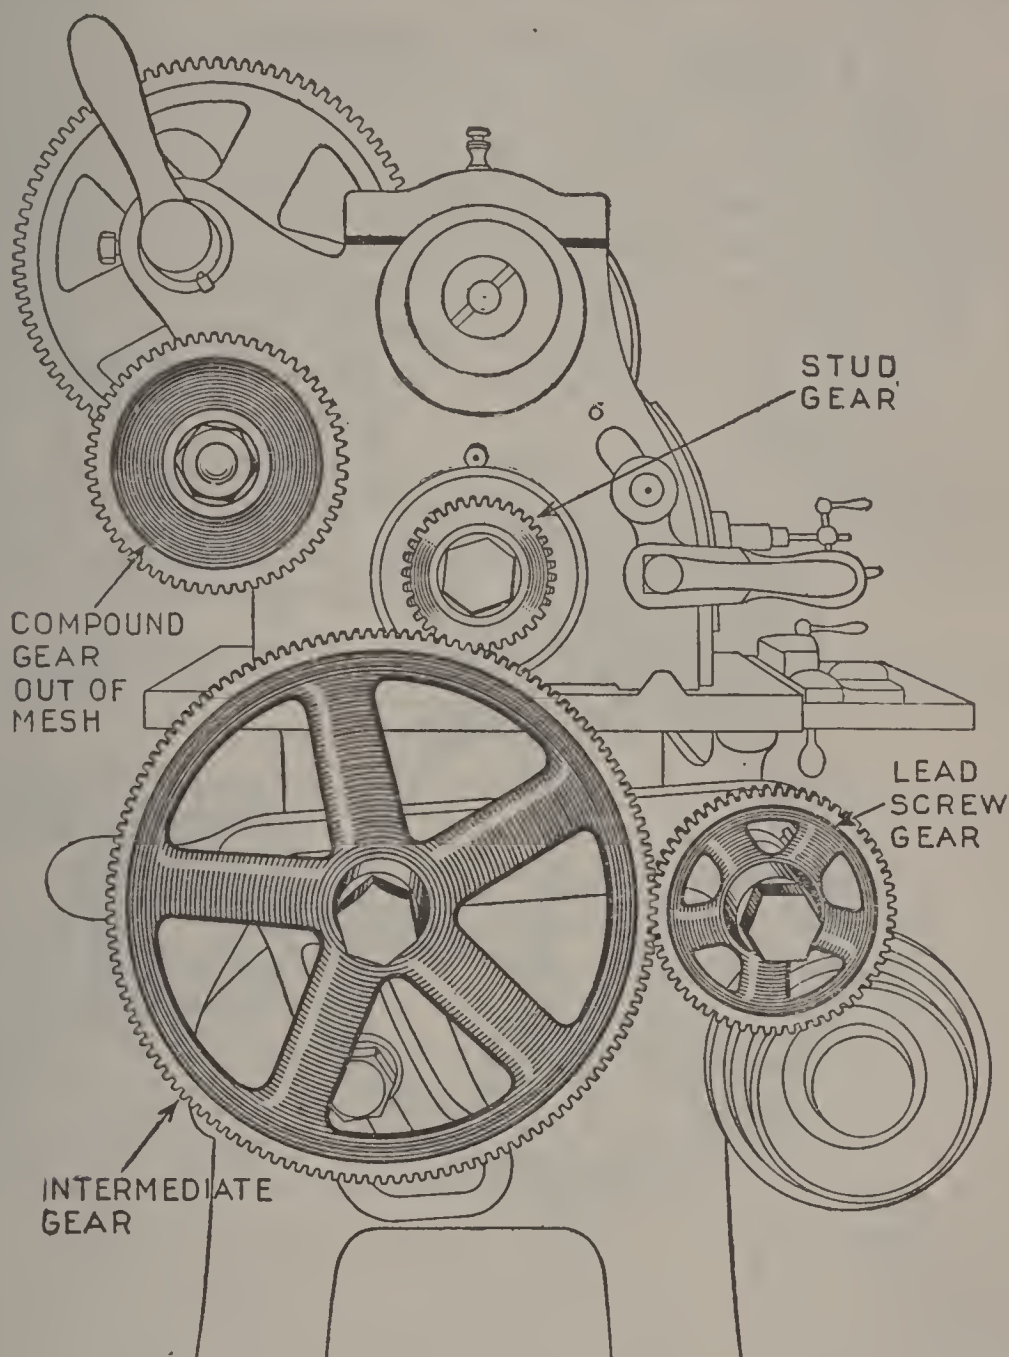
SIMPLE TRAIN OF GEARS FOR THREAD CUTTING
